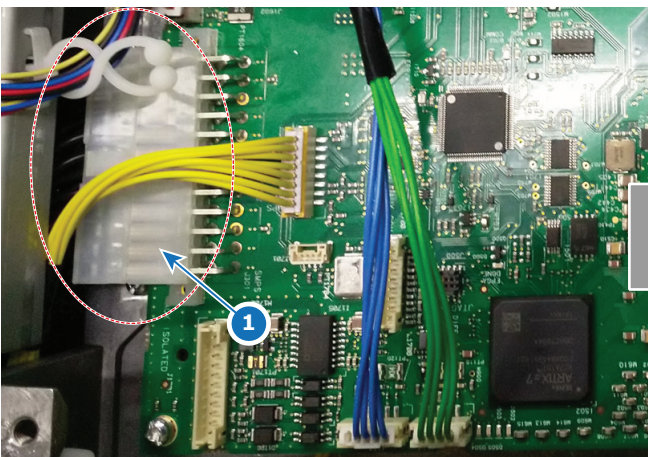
SMPS location on the FMCB and wiring details of the connector
